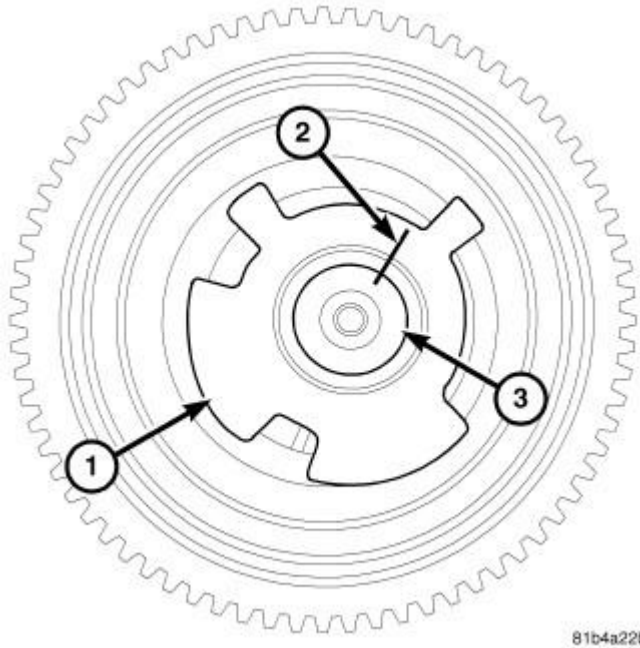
Marking CMP Sensor Reluctor Wheel & Exhaust Camshaft
